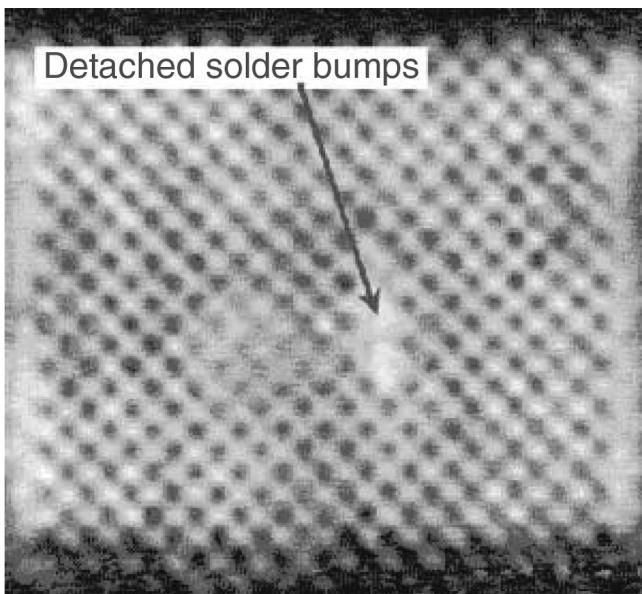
Acoustic image of solder bumps in a ceramic ball grid array package. Comparing this image with the results of X-ray microscopy indicated that some of the solder bumps had separated from the die surface.
